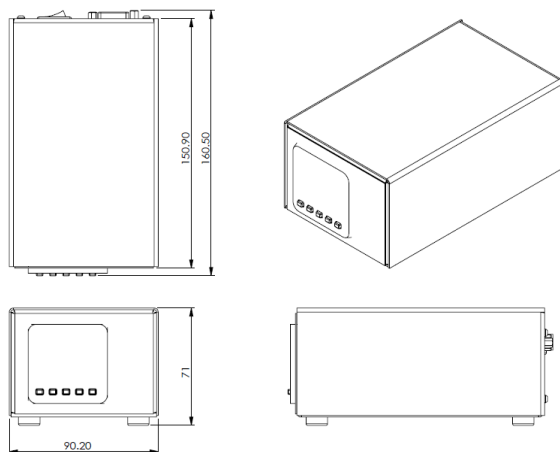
Mechanical drawing of the TC-038D (Unit : mm)
